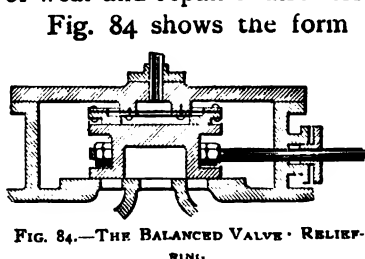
THE BALANCED VALVE · RELIEF-RING
